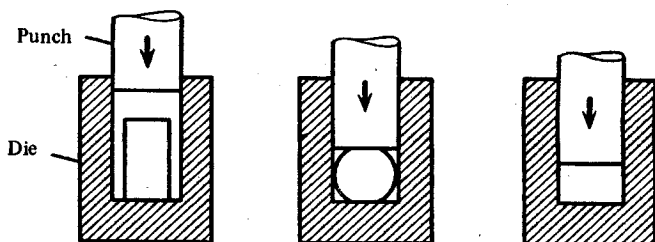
Closed die forging is a special form of impression die forging that does not depend on flash formation to complete die filling. As shown here, the die impression is completely closed to external metal flow.
